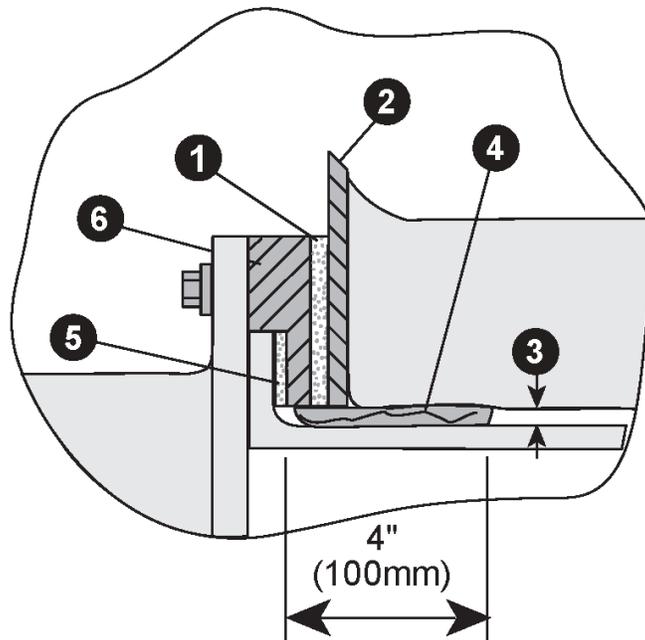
Silicon Carbide Combustor Mounted to Furnace Chamber
